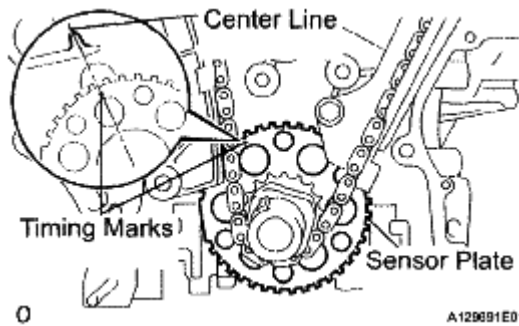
Identifying Timing Mark On Crank Angle Sensor Plate
